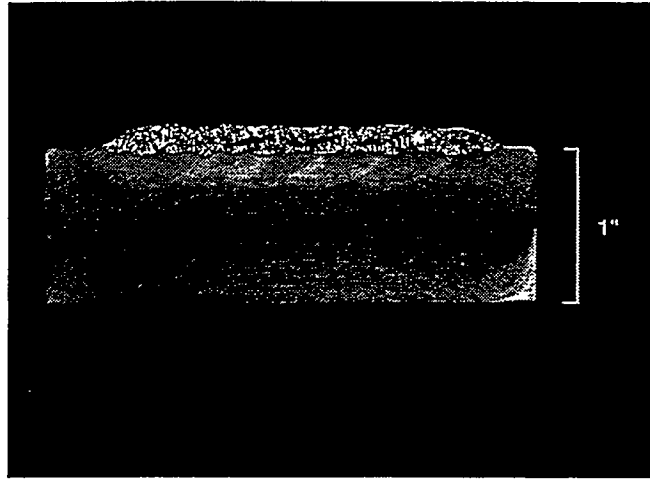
Multipass weld pad produced with composite filler metal using the automatic gas metal arc process on 2 1/4 Cr-1 Mo base plate.
